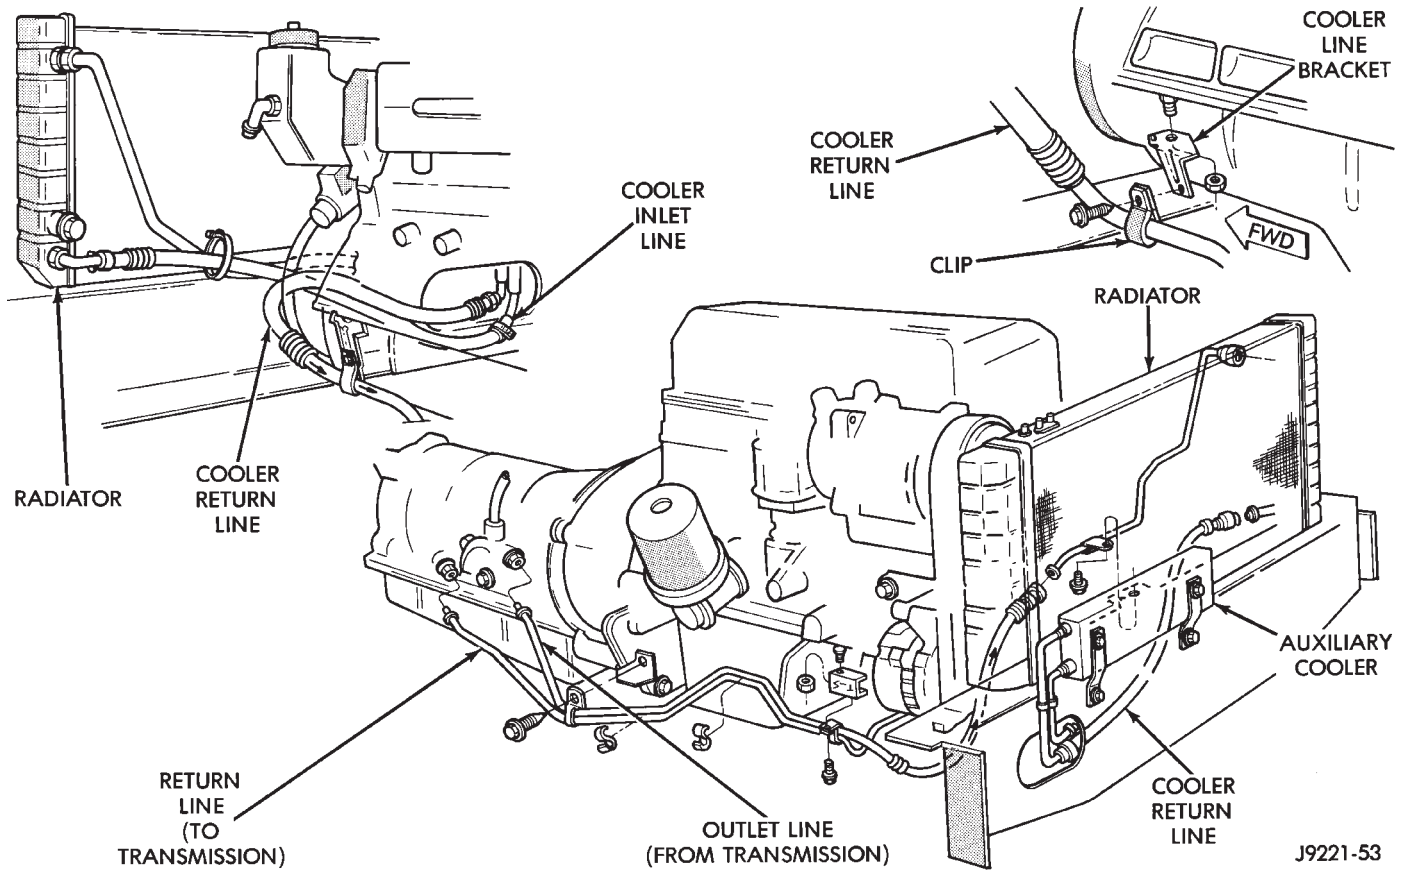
Auxiliary Cooler Mounting (Left Hand Drive)
